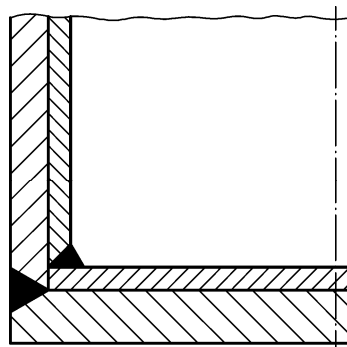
Fillet weld on cylindrical shell to head or bottom
